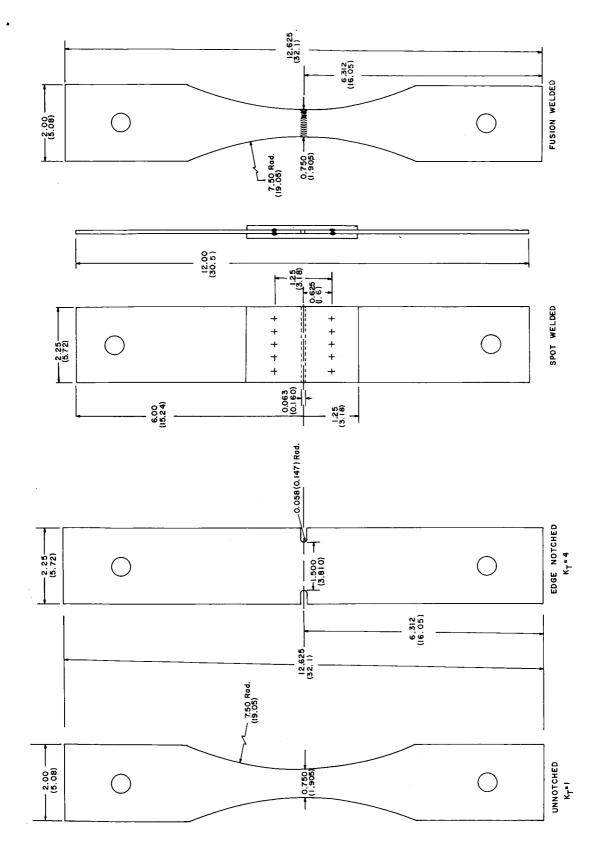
Fatigue specimens. All dimensions are in inches (centimeters).
